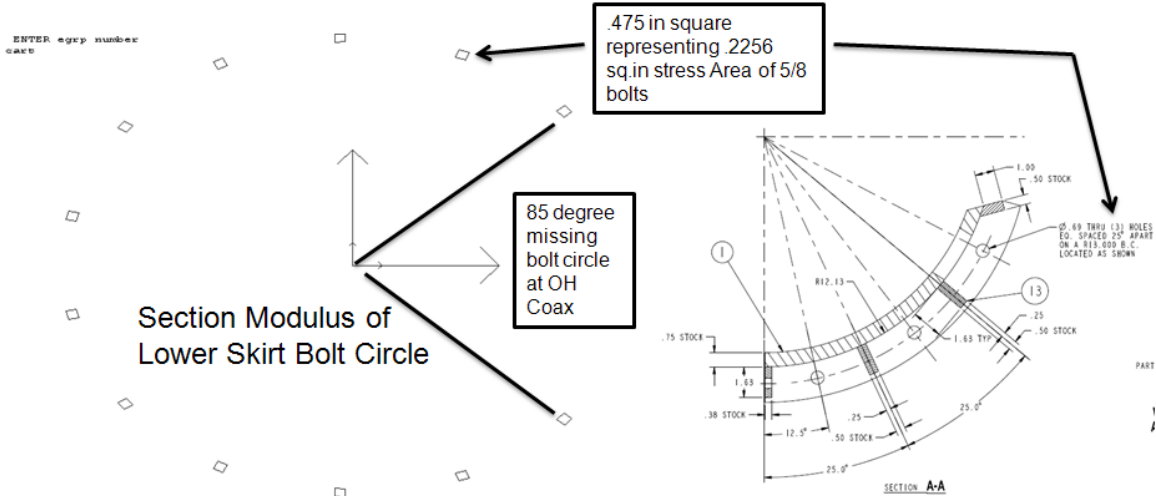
Section Modulus of the Lower Skirt Flange Bolting
